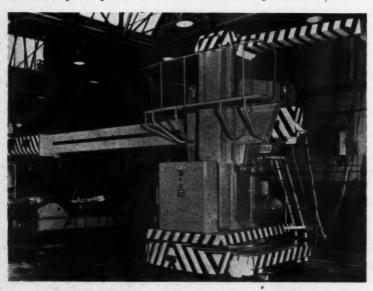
Yates twin-pillar welding column with retractable boom
